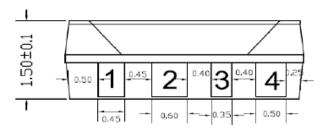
IN-PI42TAS(X)R(X)G(X)B Package Outline Dimensions
